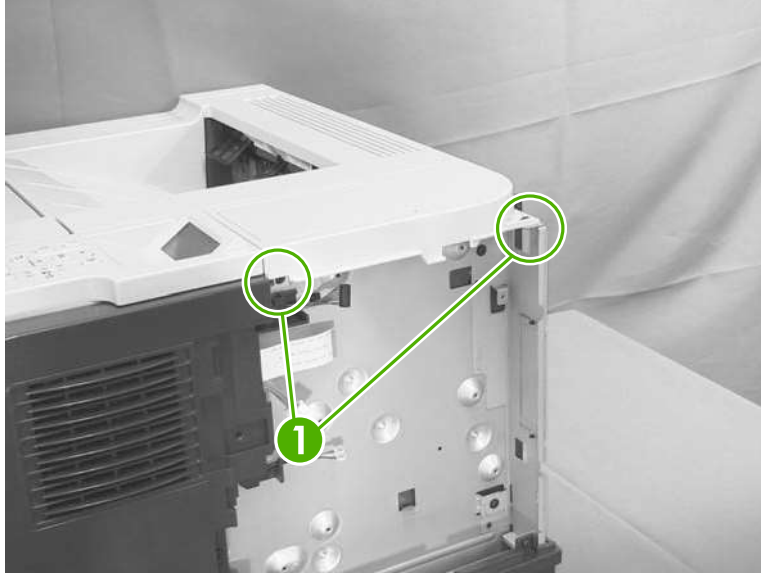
Remove the cartridge-door assembly (3 of 3)
